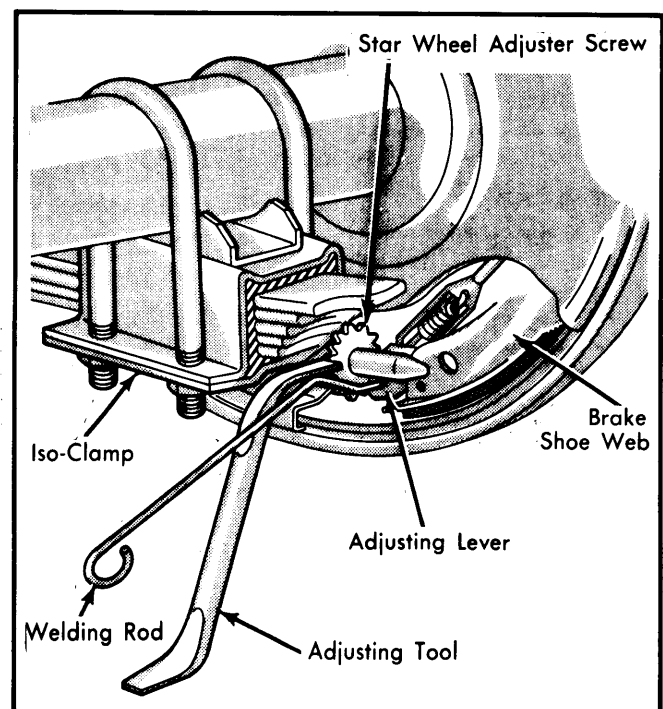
Adjusting Rear Brake Shoe-to-Drum Clearance (Adjustment Shown on Models with Iso-Clamp Suspension)
